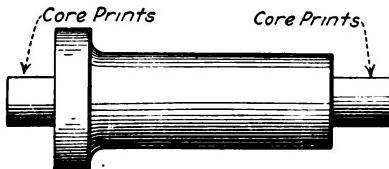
Example of a cored pattern, showing the core prints at the ends
